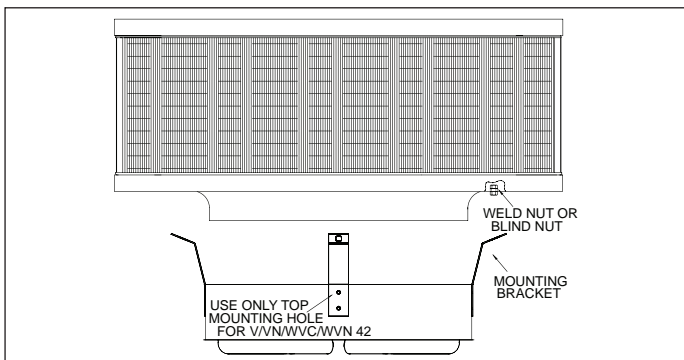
Models V/VN/WVC/WVN 42-610 & VE 50-500
